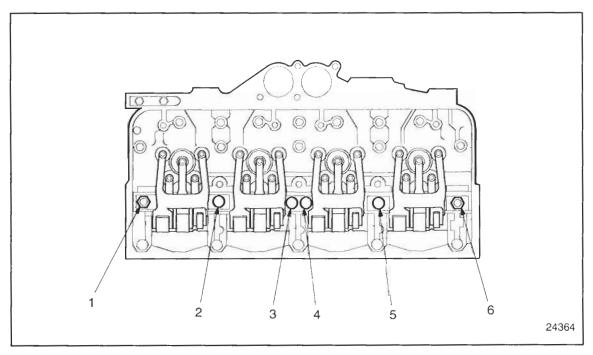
Rocker Arm Shaft Bolts and Nut Identification Numbers
